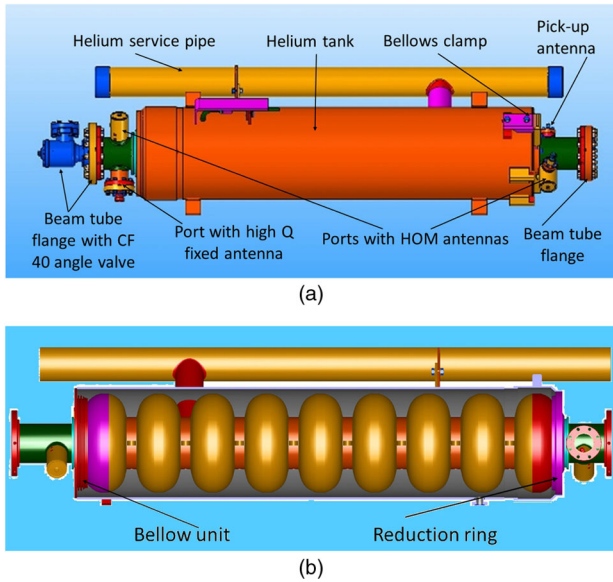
(a) Fully-equipped cavity. (b) Inside view of the cavity in the HT.
